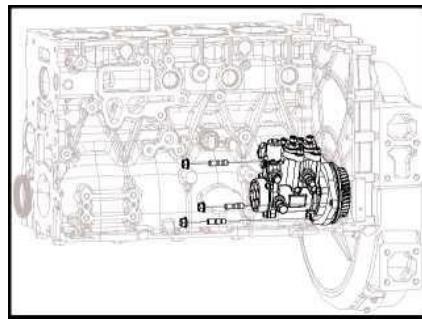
Remove bolts with two thread ends fixing high pressure pump flange with gear chamber
